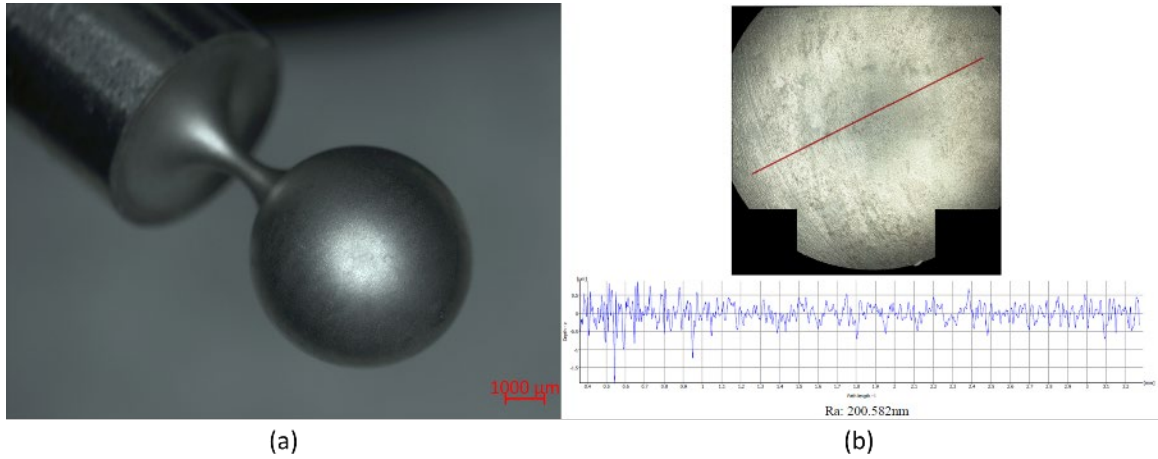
Steel sphere post LMJ faceting process (a) Macroscopic picture. (b) Ra measurement.
